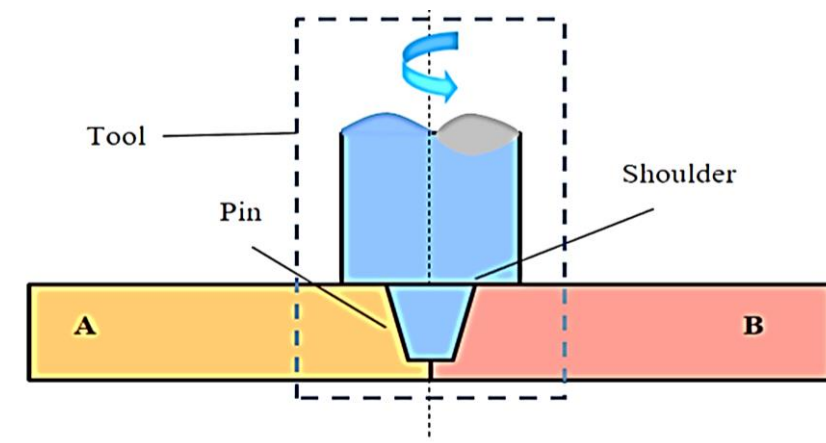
Friction Stir Welding of Dissimilar Metals [8]
